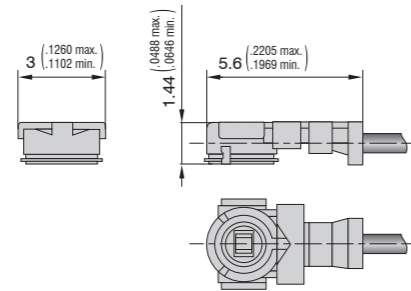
Dimensional drawing of sensor cable, dimensions in mm (inches, rounded off)
